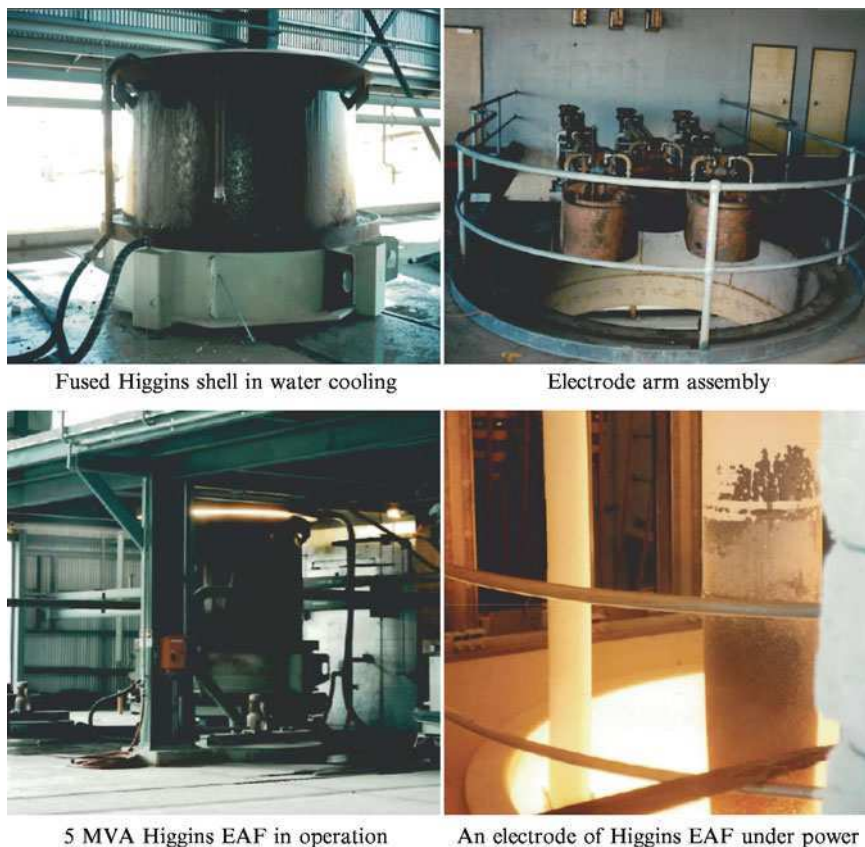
Examples of Higgins furnaces and equipment details (courtesy Whiting Equipment, Canada Inc.)
